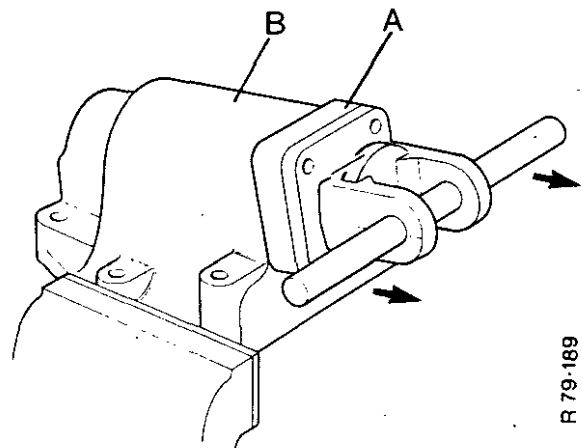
DISASSEMBLY OF THE SINGLE RATE SENSING UNIT
